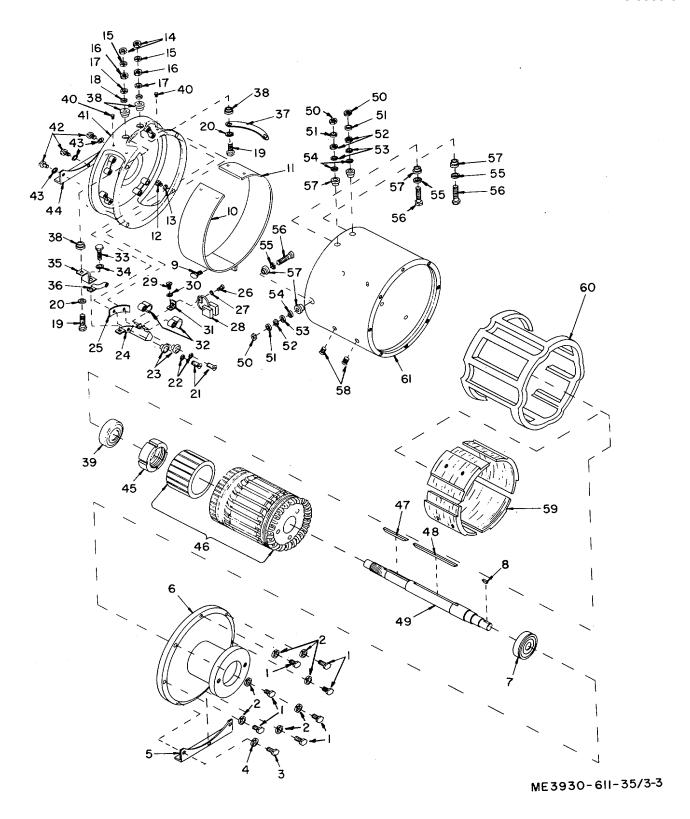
Hydraulic pump motor, disassembly and reassembly.
